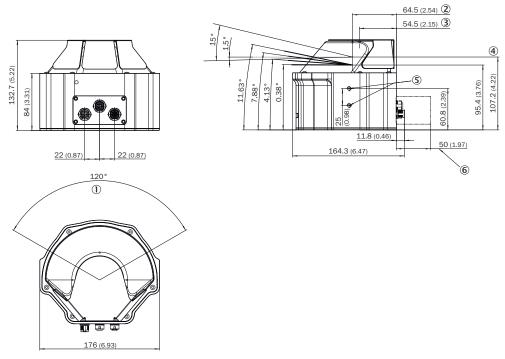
Dimensional drawing of the MRS6000; dimensions in mm (inch), decimal separator: period
